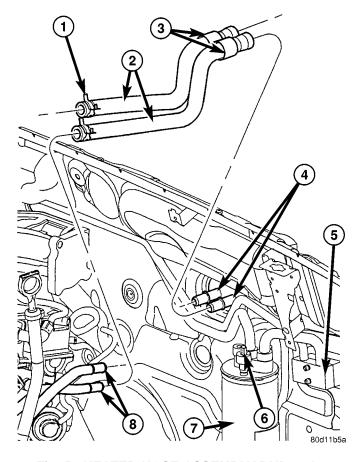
HEATER HOSE ASSEMBLY-RHD 2.0L
